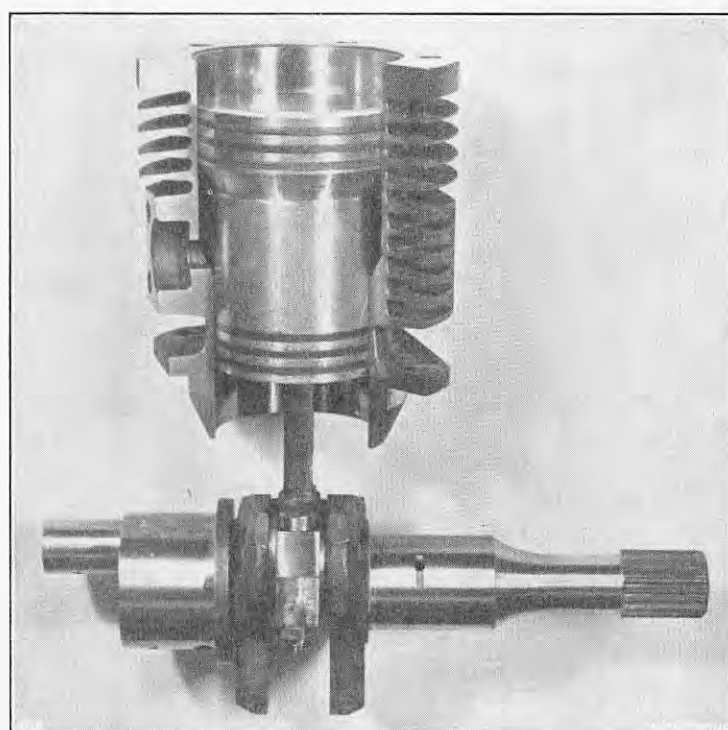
CRANKSHAFT AND CYLINDER ASSEMBLY.
